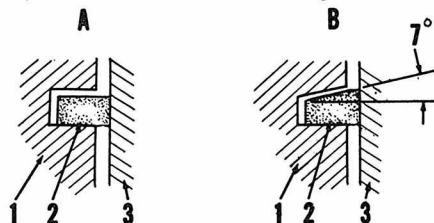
Comparison of standard and Keystone type piston and ring assemblies.
